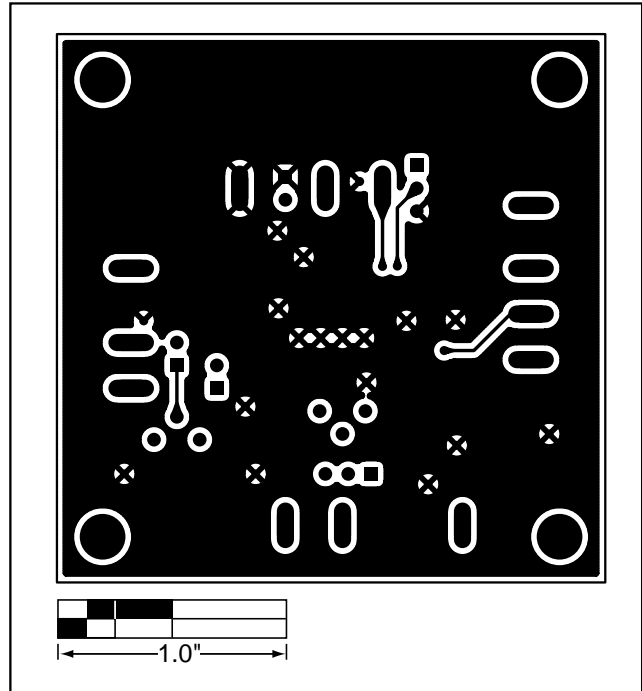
SUPEVKIT PC Board Layout—Solder Side
